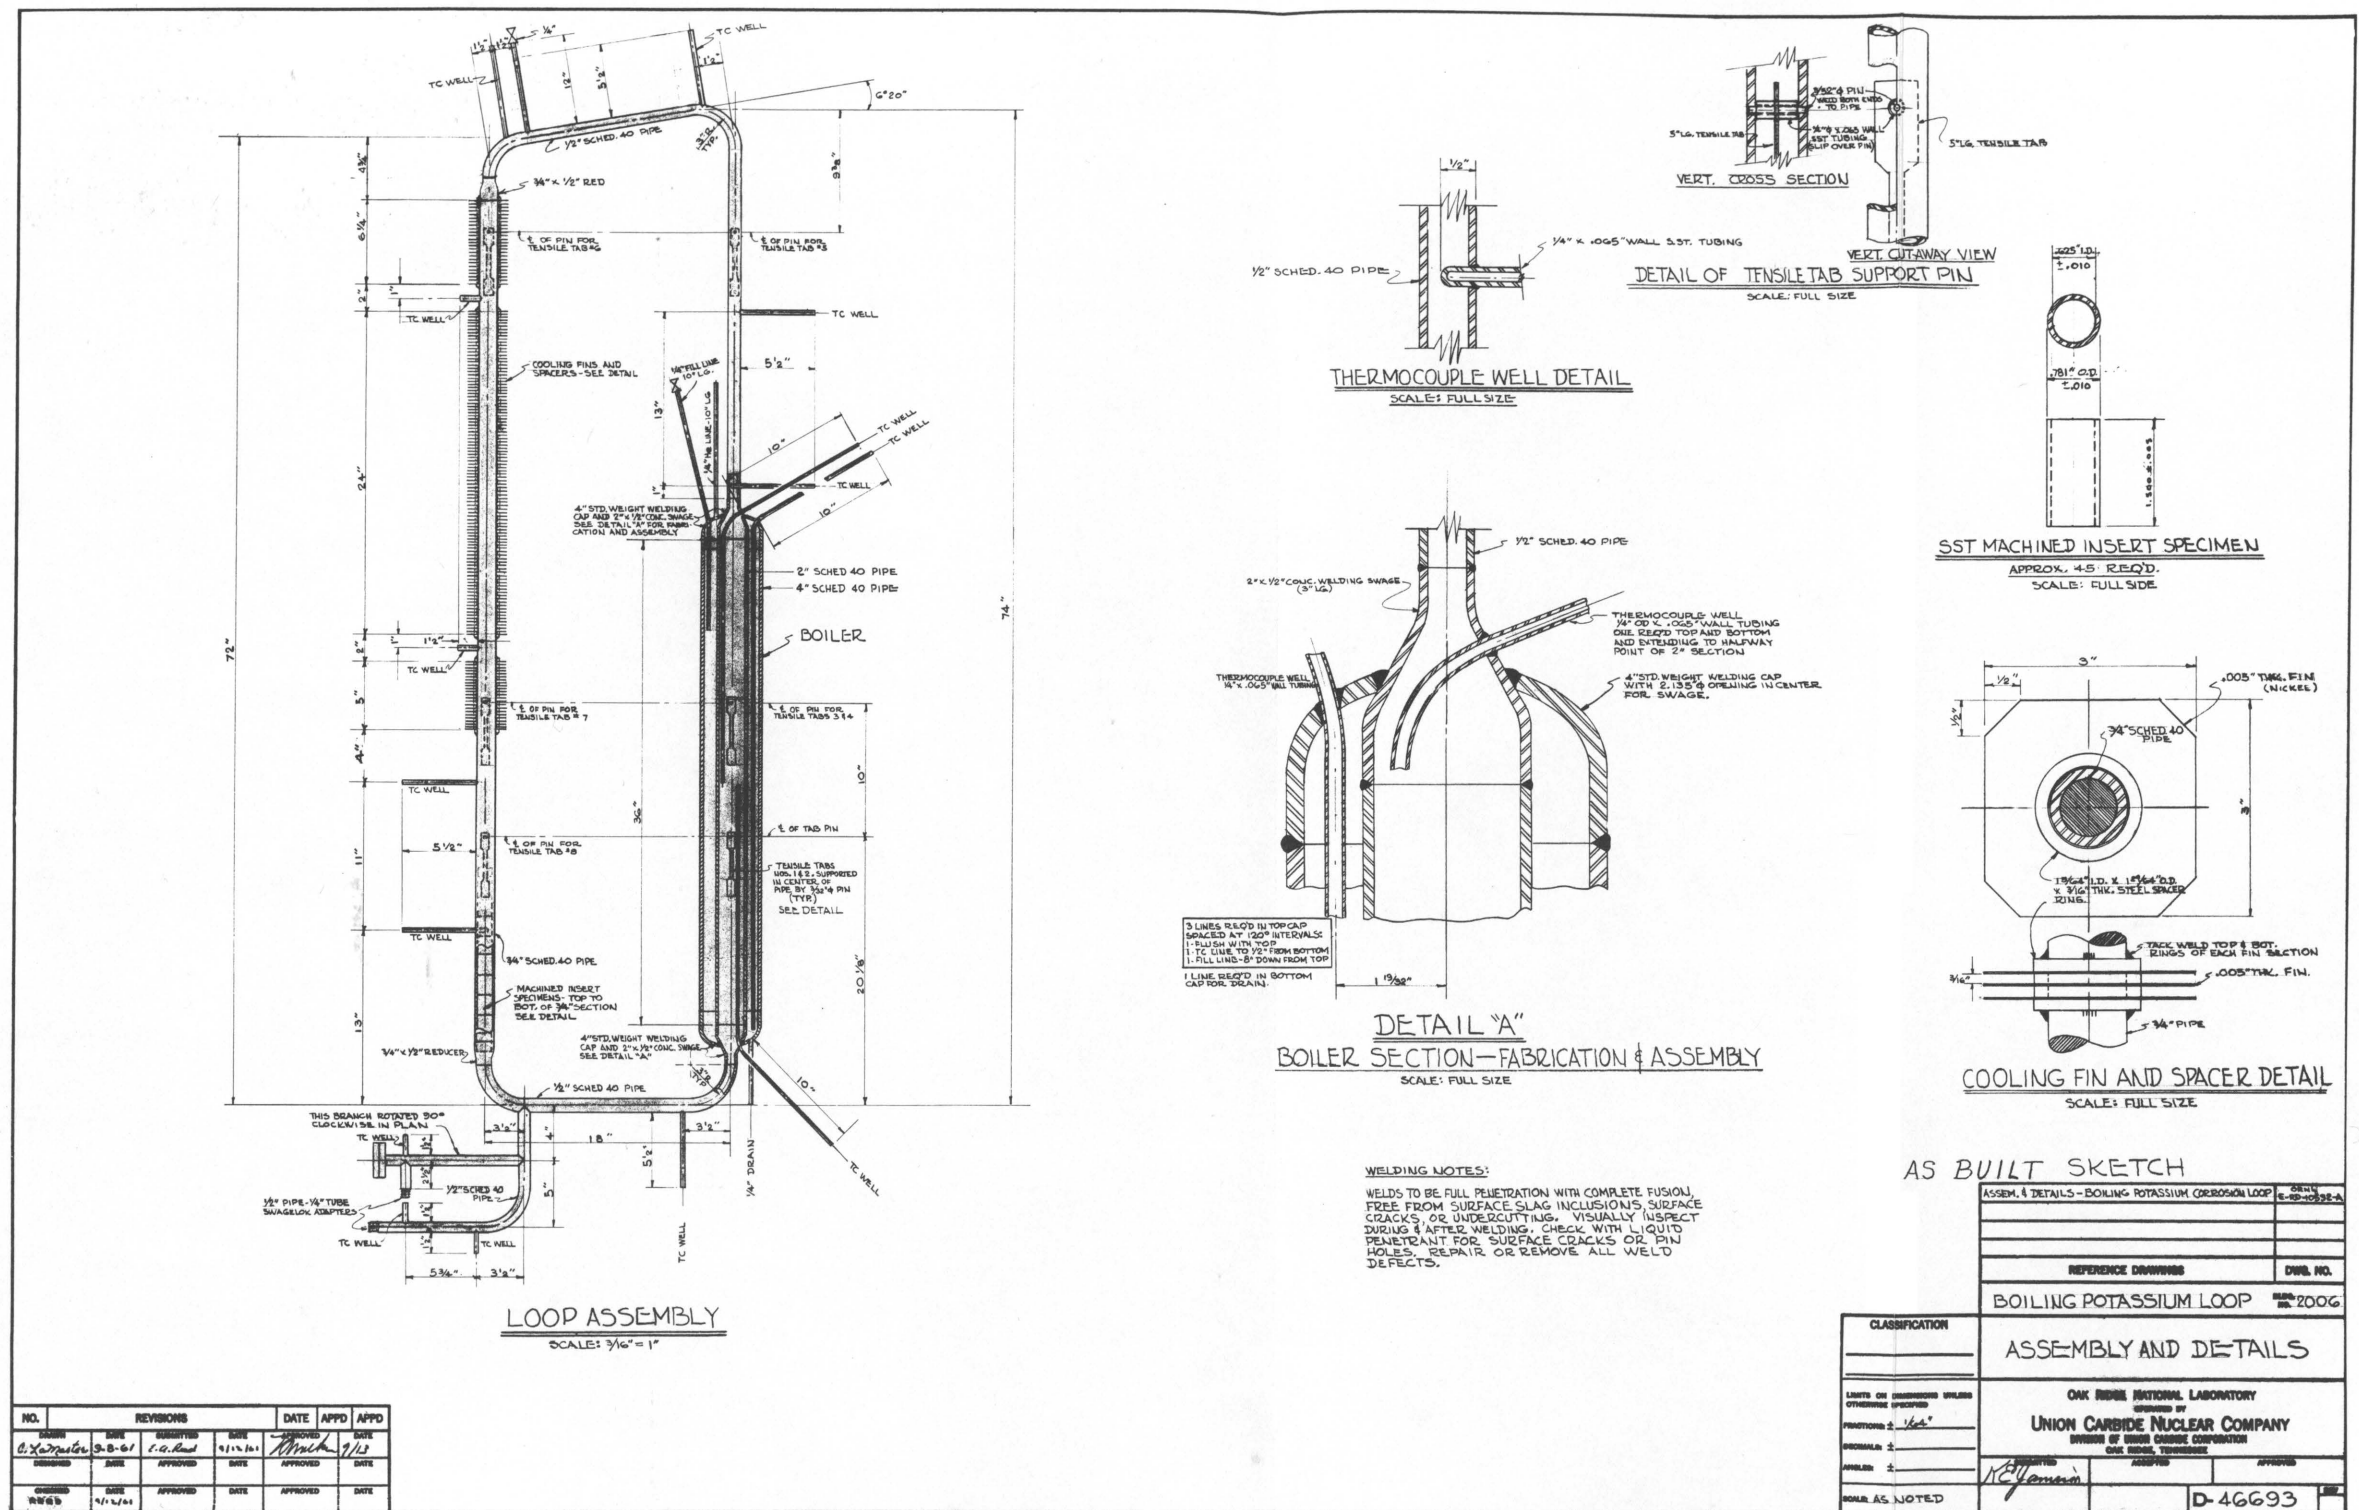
As-Built Sketch Assembly and Details - Boiling-Potassium Corrosion Loop.
